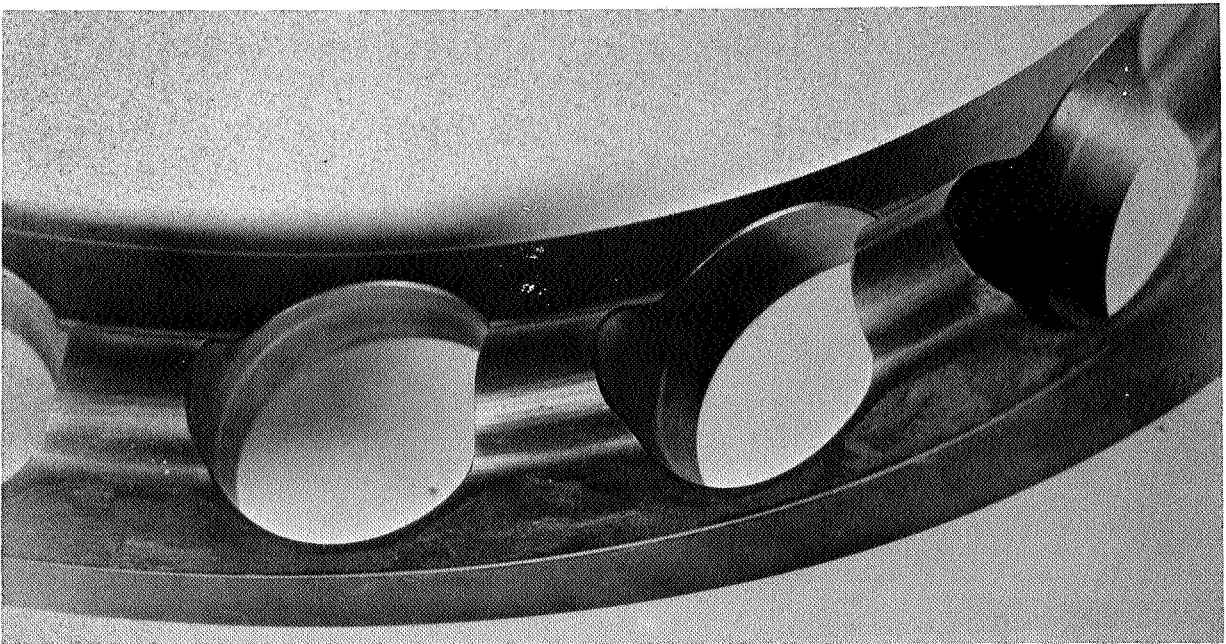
CAGE BALL POCKETS - BEARING S/N 38
